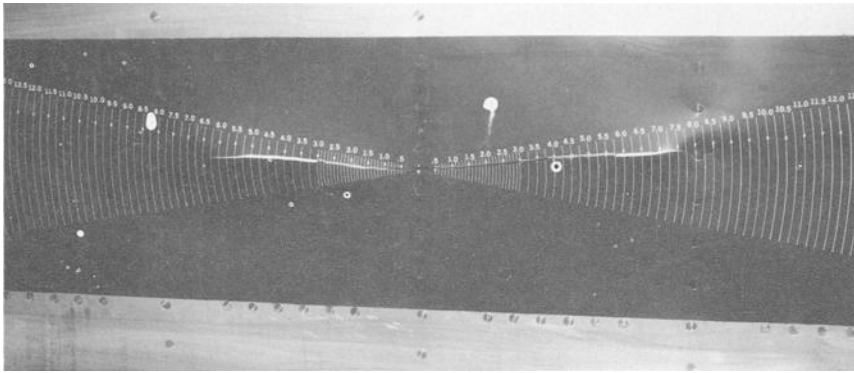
Arrest of crack after fast fracture at gross stress of 39,931 psi, panel 11, test 2.
